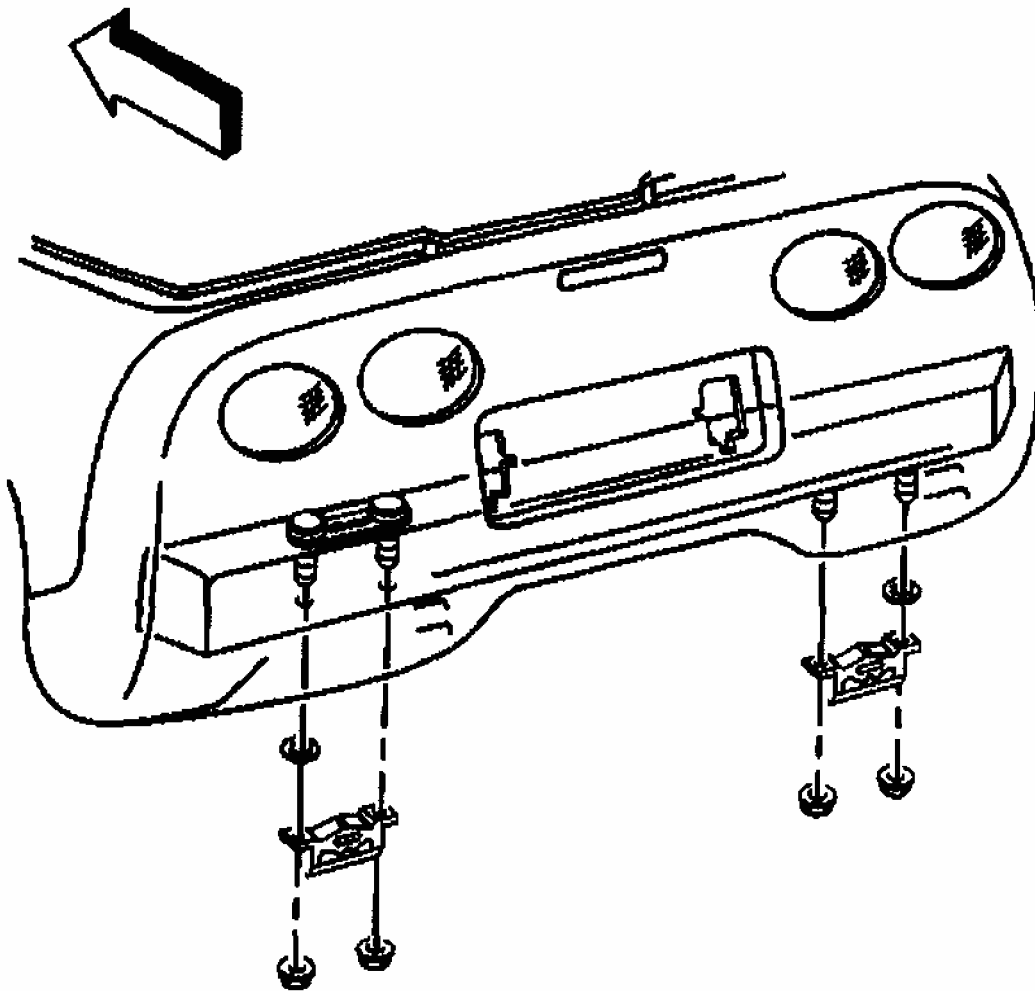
Installing Upper Exhaust Pipe Hanger Bolts
